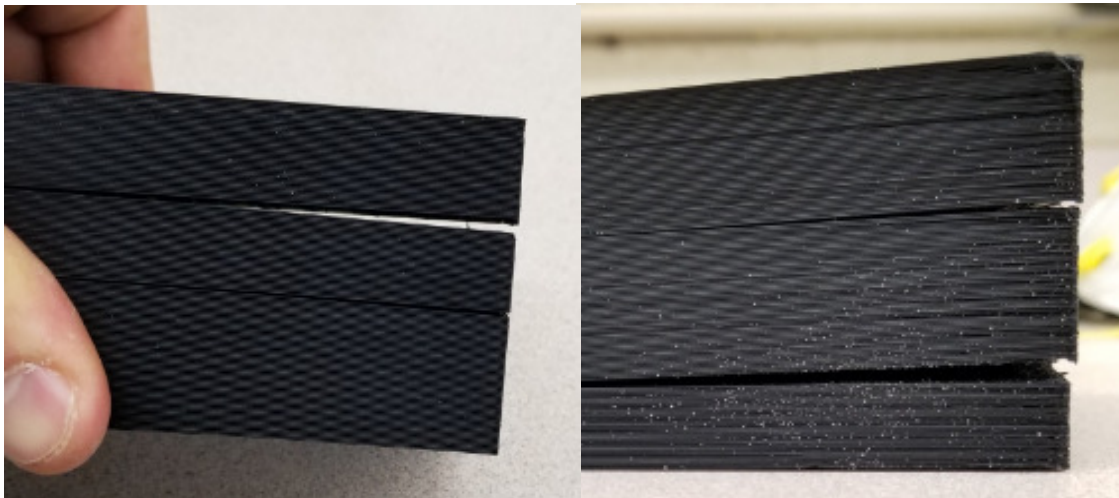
Interlayer adhesion failure. A failed CB beam on the left and a failed NC beam on the right.
